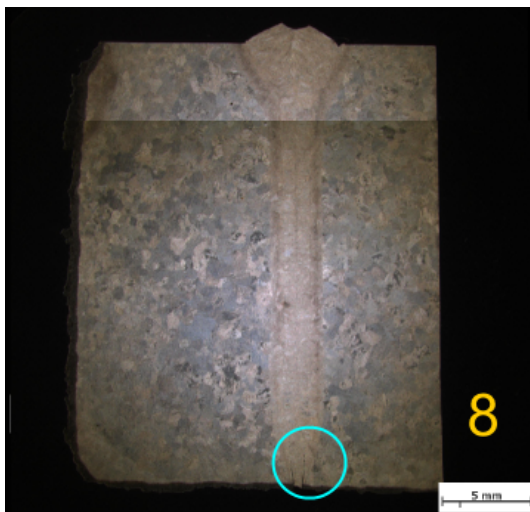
WTP, blind weld 8 [Adler]: underfill of weld seam and longitudinal crack in the weld metal zone at the root (marked with blue circle)
